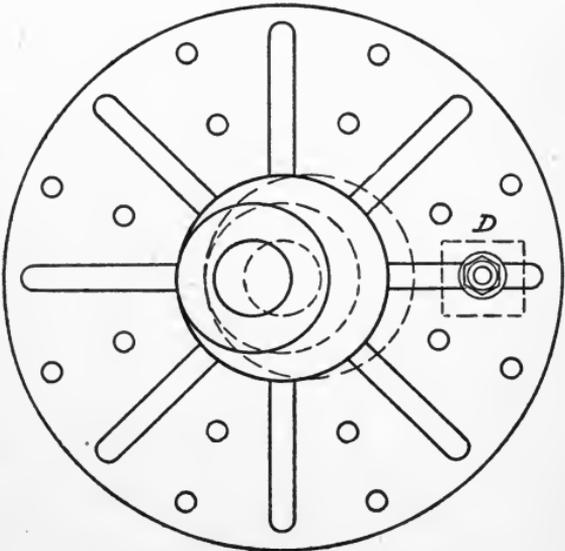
Piece Mounted on Faceplate for Eccentric Turning
